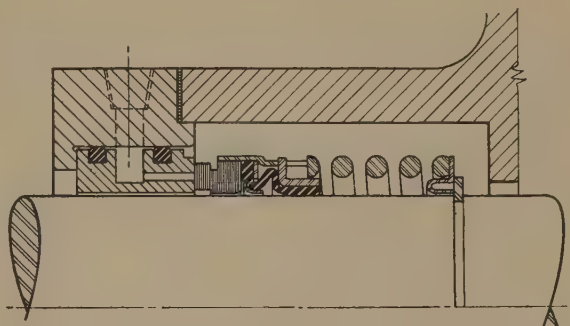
TYPICAL LUBRICATED SEAT CONSTRUCTION
